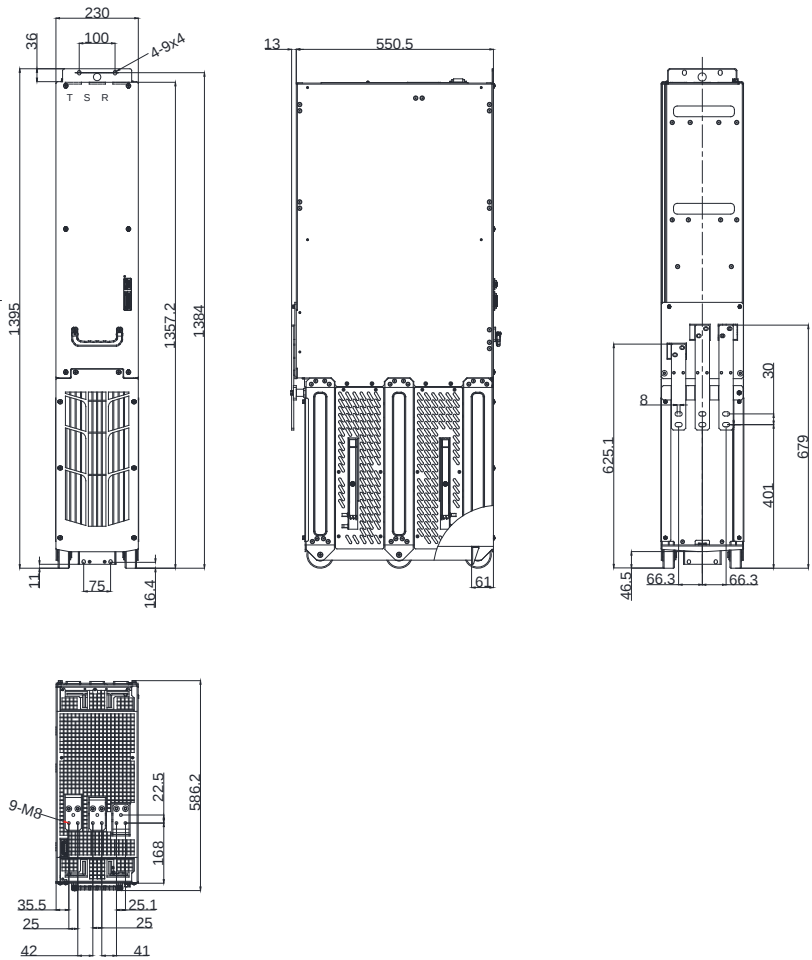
Dimensions of the active rectifier filter module (mm)
